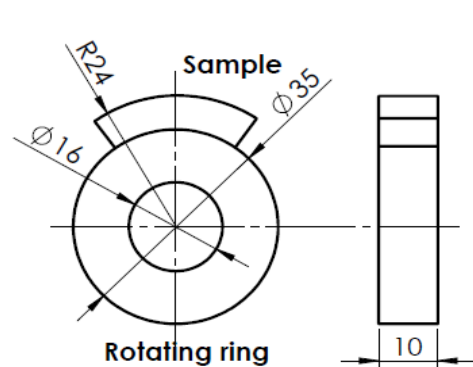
The shapes and dimensions of the friction pair block-on-ring.
